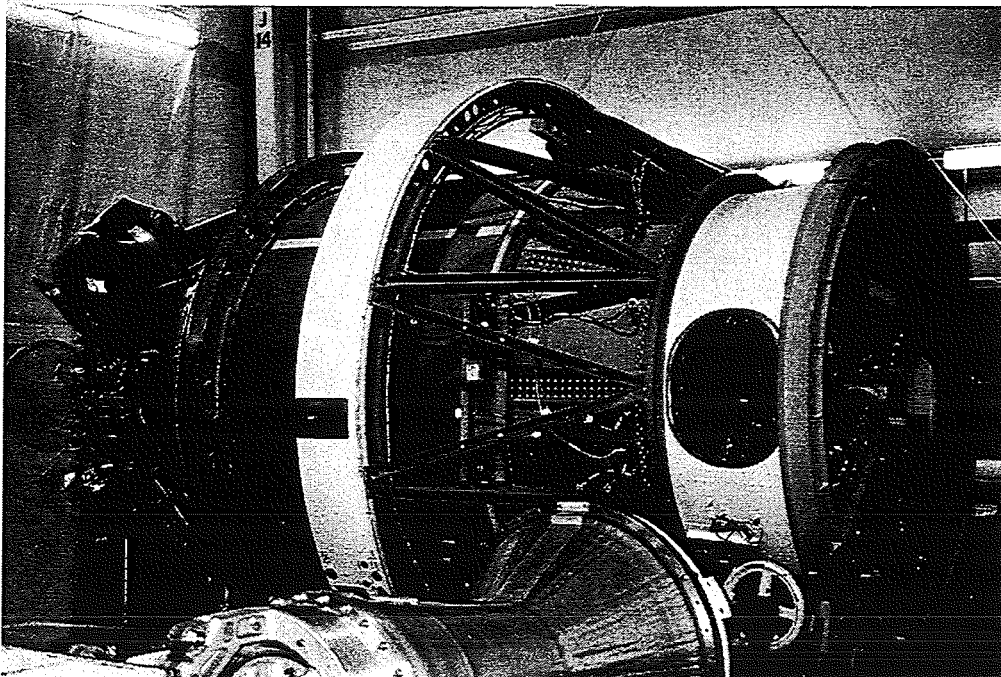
Pre-Flight Photograph of Delta 2nd Stage Assembly
